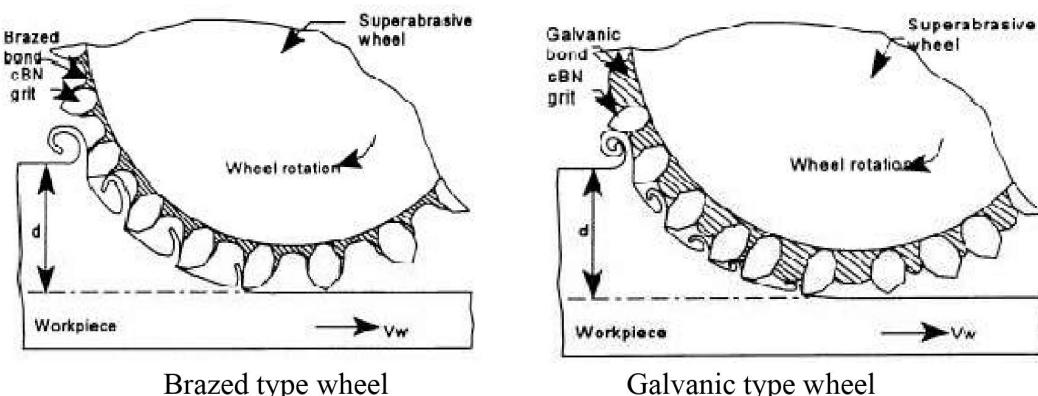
Comparison of brazed type and galvanic type bonded single layer CBN grinding wheel
